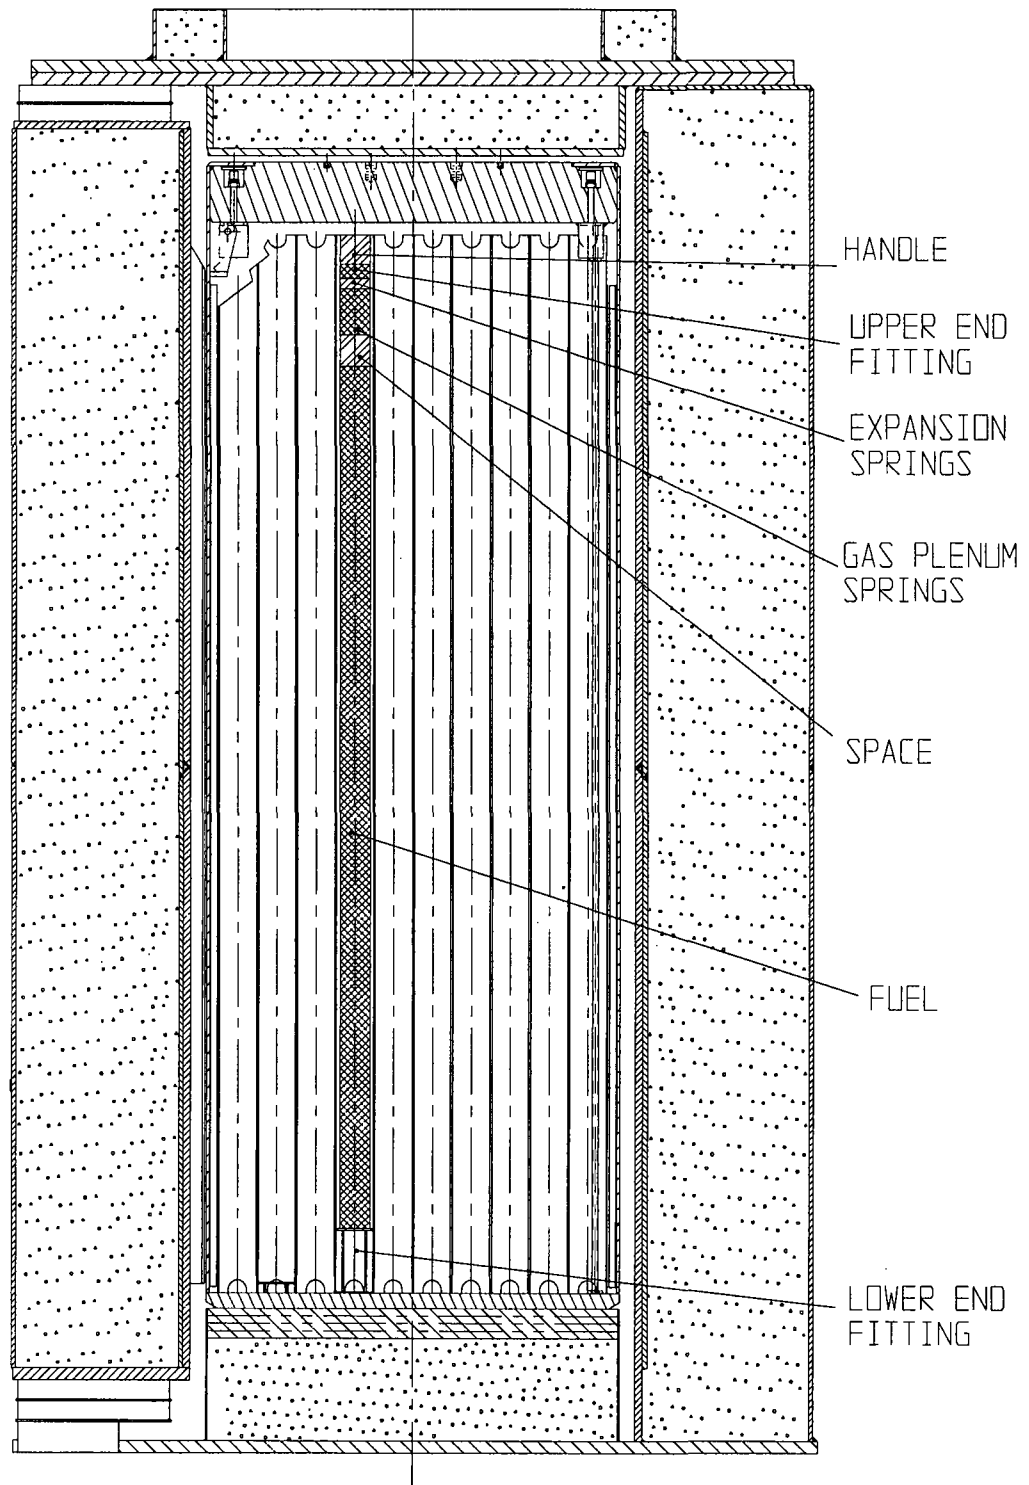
; AXIAL LOCATION OF BWR DESIGN BASIS FUEL IN THE HI-STORM OVERPACK
